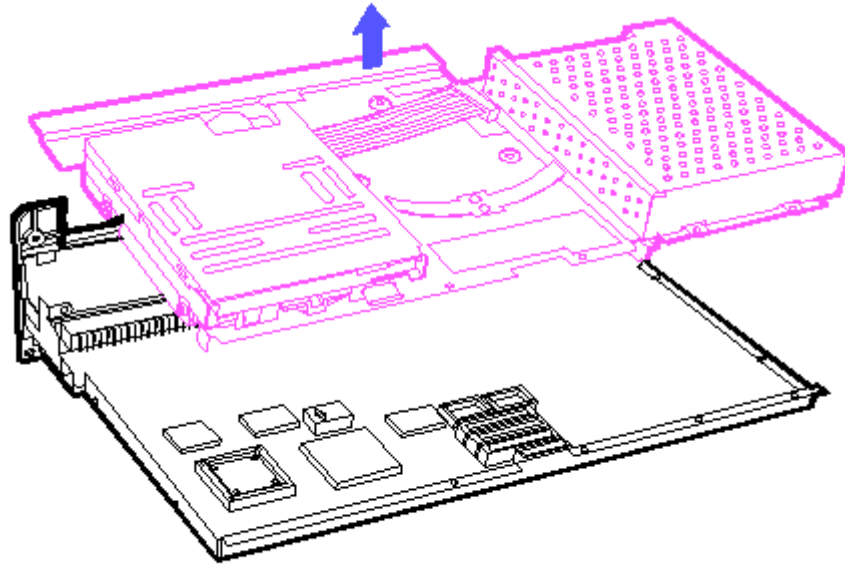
Removing the Drive Mounting Plate with Mass Storage Devices
